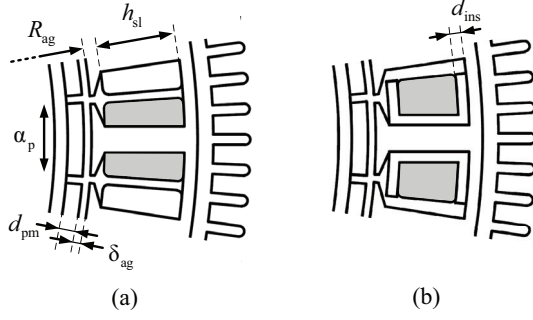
Definition of machine dimensions for (a) the LV machine and (b) the MV machine with additional insulation; the windings around a stator tooth are highlighted in gray.
